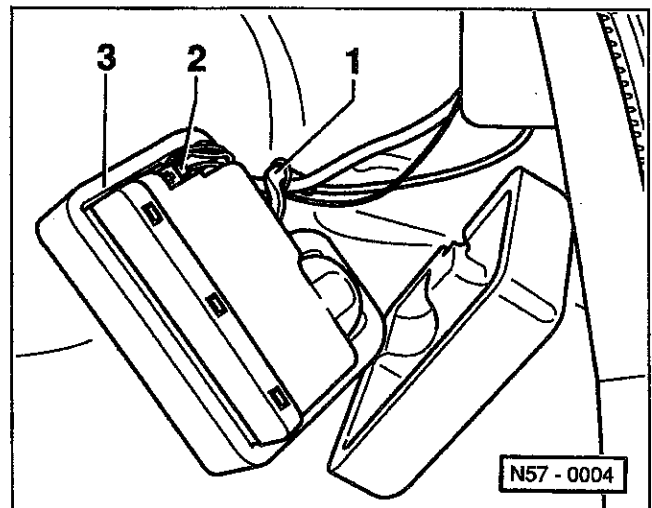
Central locking system pump and control module (2), housing covers (3) and multi-pin connector with bi-pressure hose (1). Note the bi-pressure hose connection when removing multi-pin connector.
